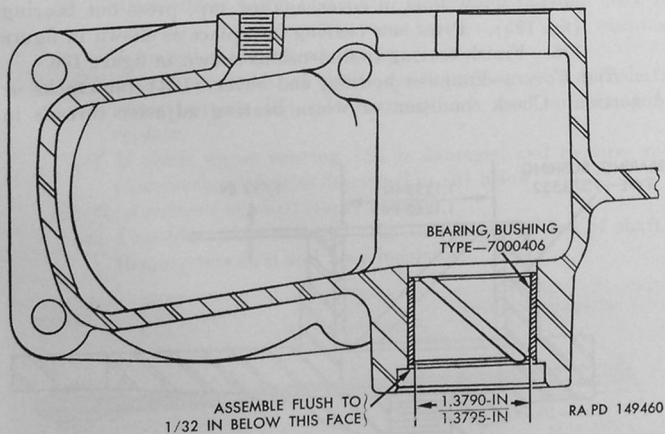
Sectional view of steering gear housing showing Pitman shaft bearing installed.
